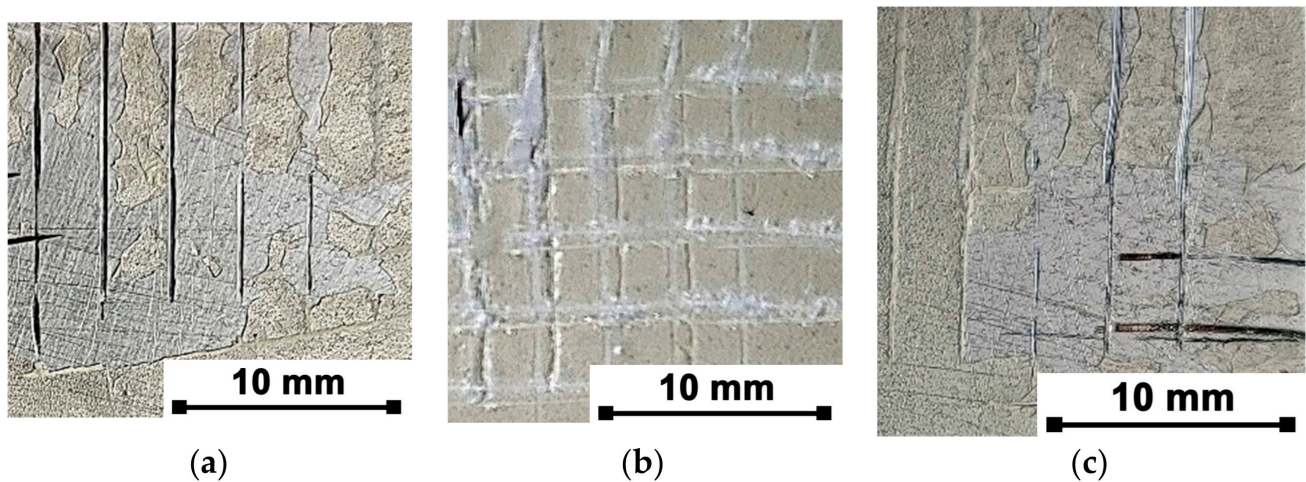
Photos of coating surfaces after the cross-cut test: (a) AO; (b) APO; (c) ACO.
